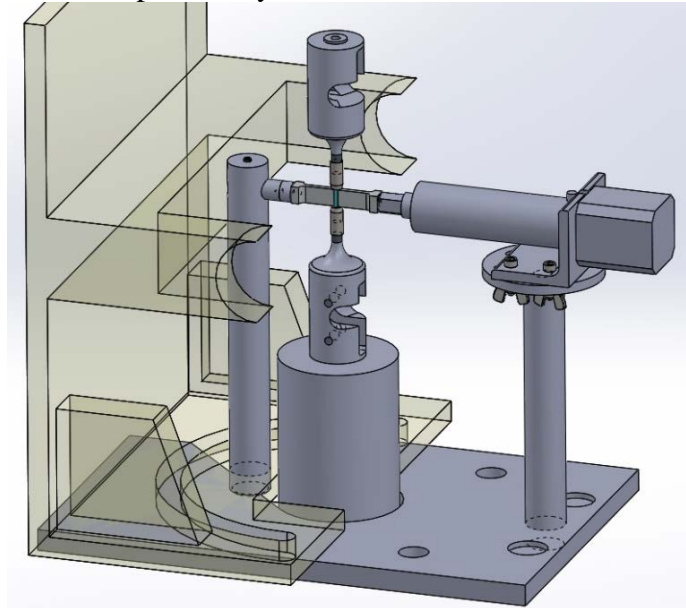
Solidworks Model of Electromechanical Mounting Design
